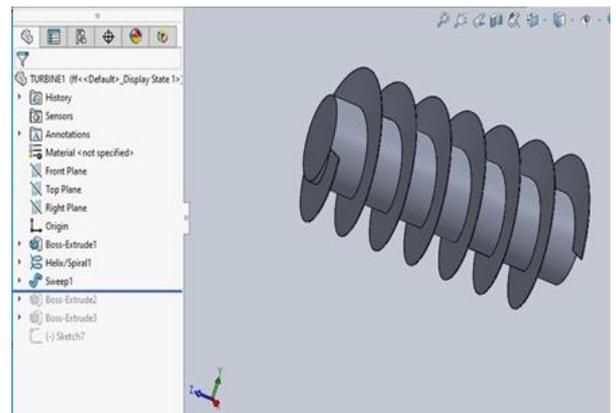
drawing the geometry of the Archimedes screw turbine model by Solidwork package
